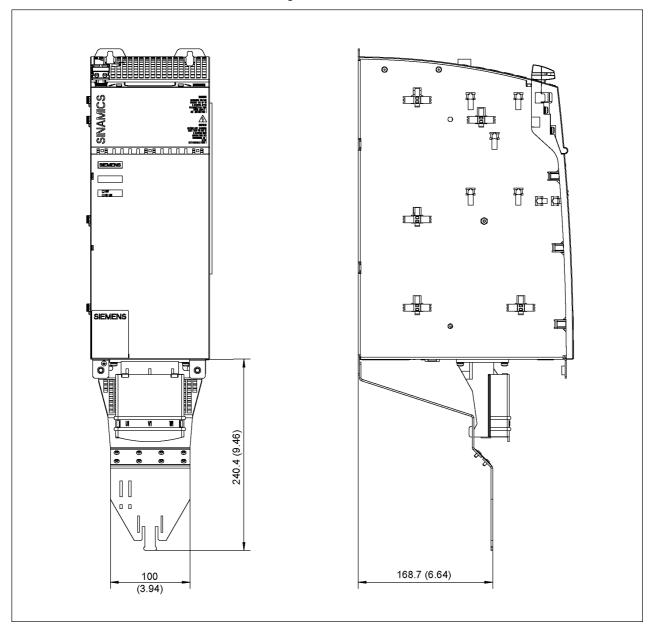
Dimension drawing of shield terminal plate on a 150 mm component (Line Module or Motor Module) with internal air cooling
